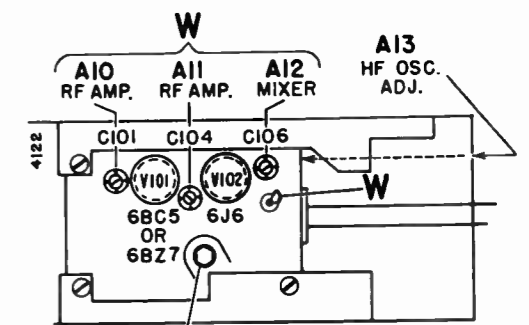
Top View of TV Tuner Showing Adjustment Locations.
